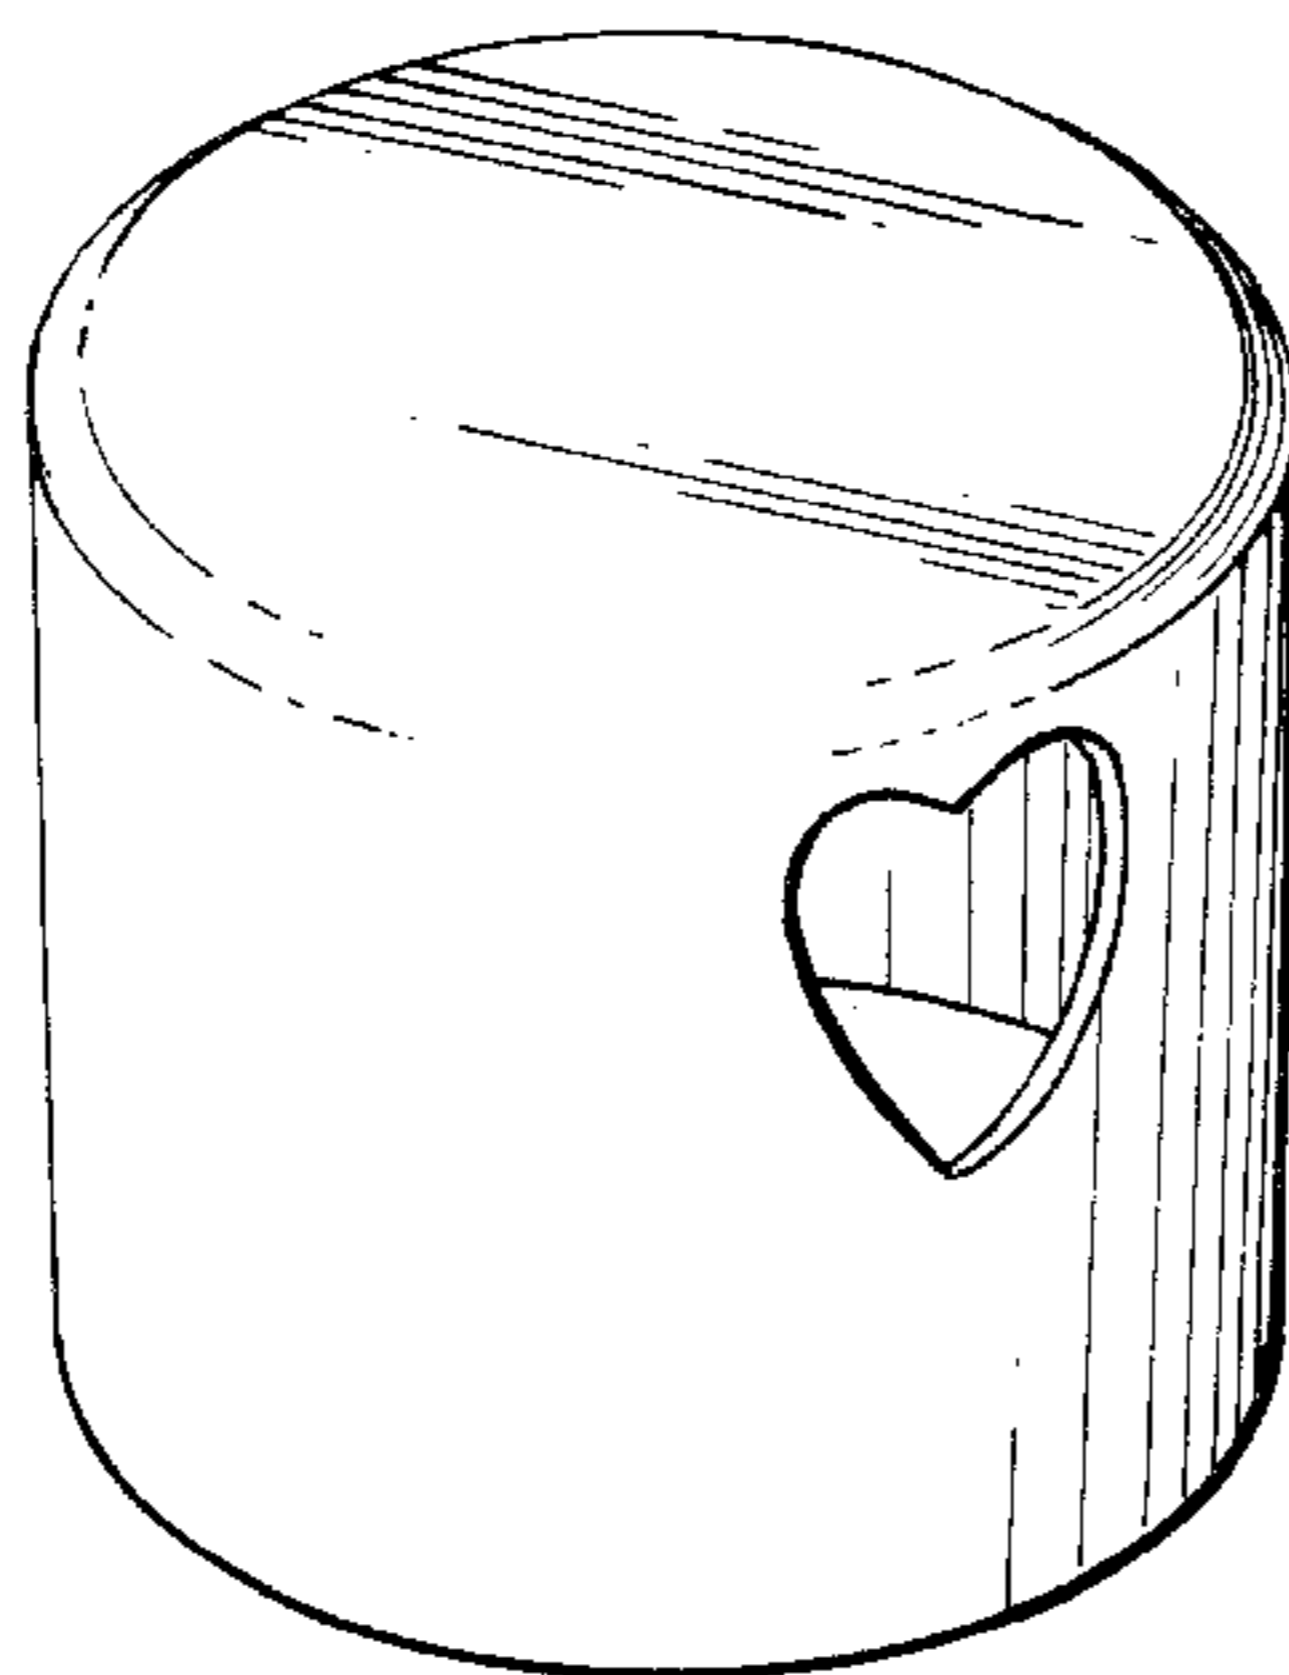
is a front perspective view of a spray dispenser cap, showing my new design;
